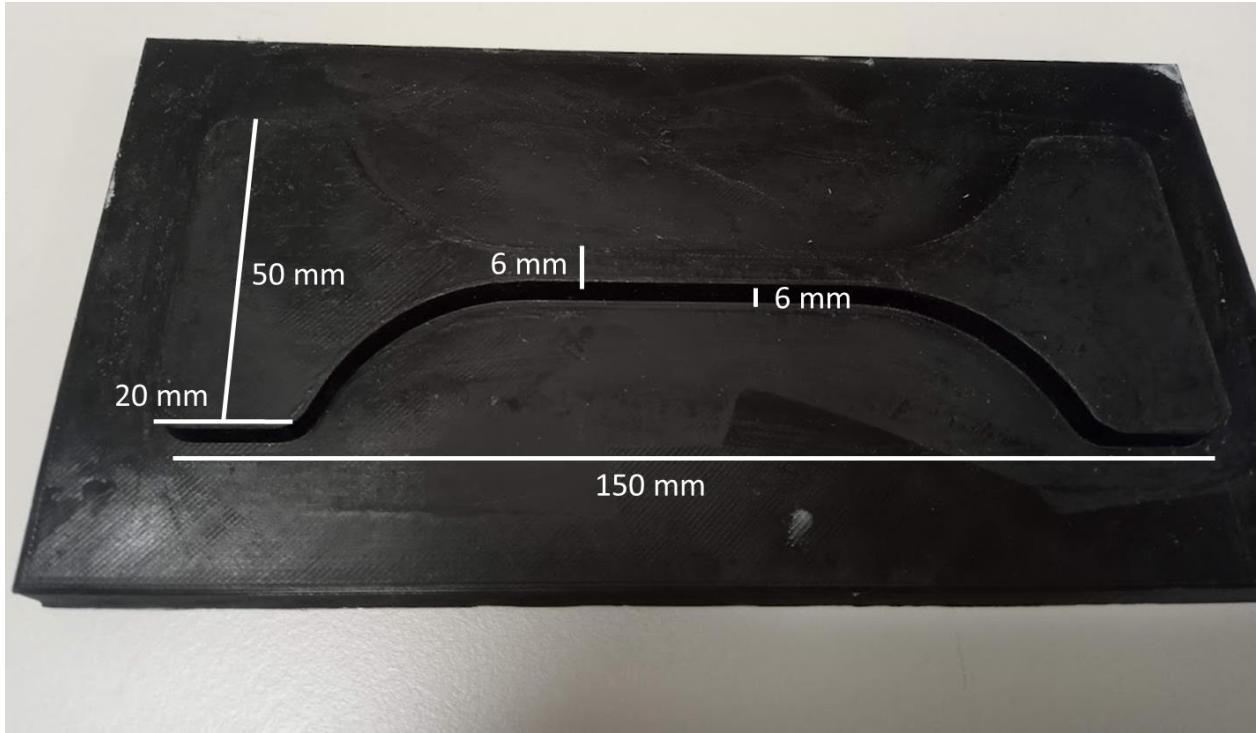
3D printed mould negative showing the dimensions of the composite sample
